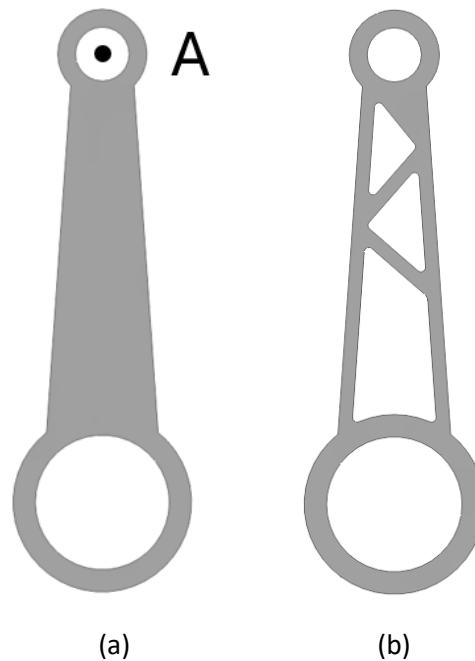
(a) Original engine rod, (b) Optimized Engine Rod
